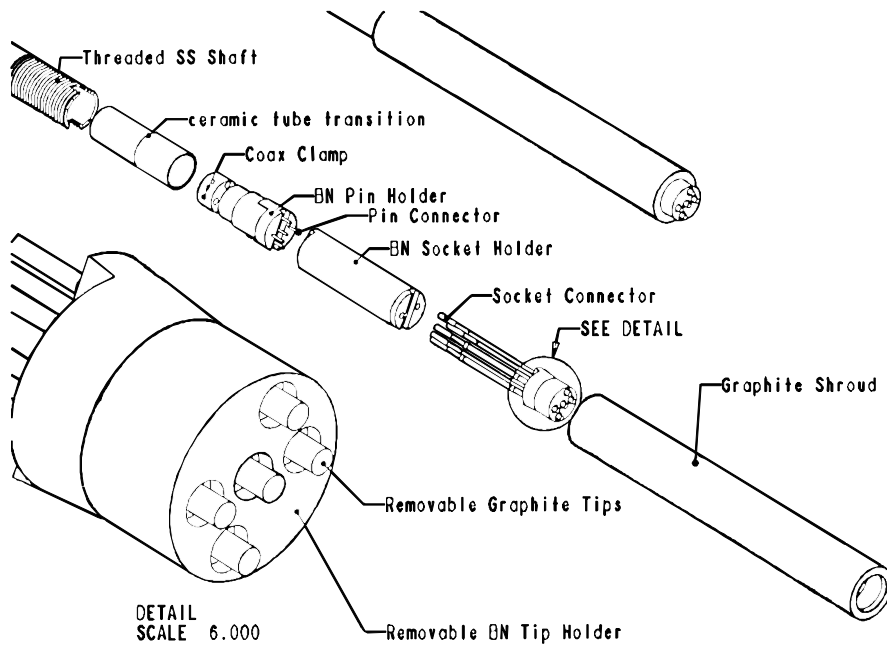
Probe head assembly and detail of boron nitride tip holder showing the modular construction which allows fast tip replacement <sup>13</sup>.
